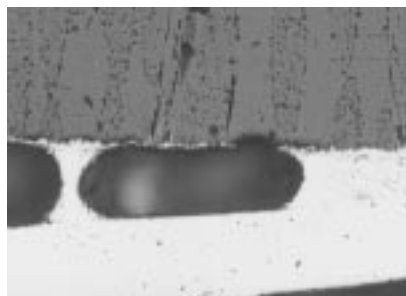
During soldering in the assembly stage, plating voids cause outgassing resulting in pin/blow holes in the solder joints.
